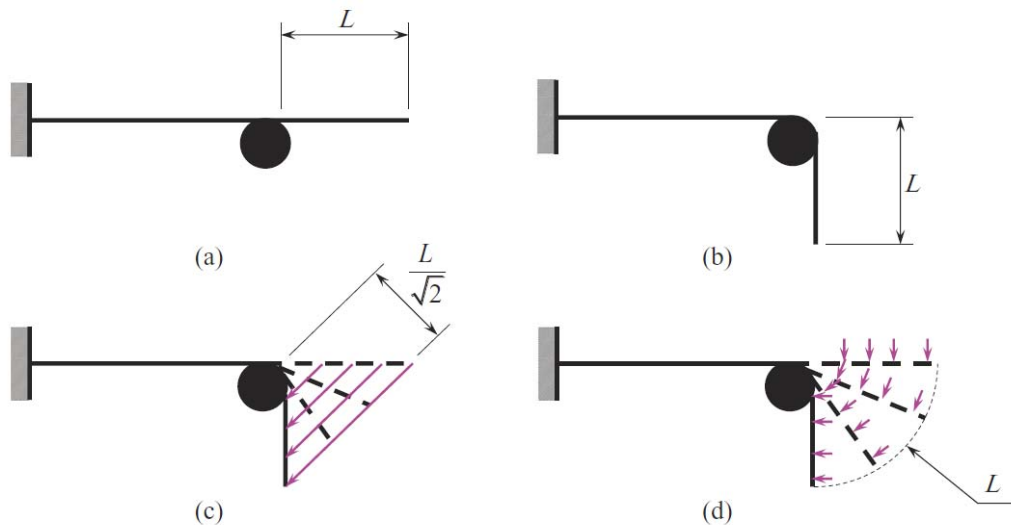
境界条件 (a) Initial shape (b) Target deformed shape (c) Forming using displacement boundary condition (d) Forming using force boundary condition
